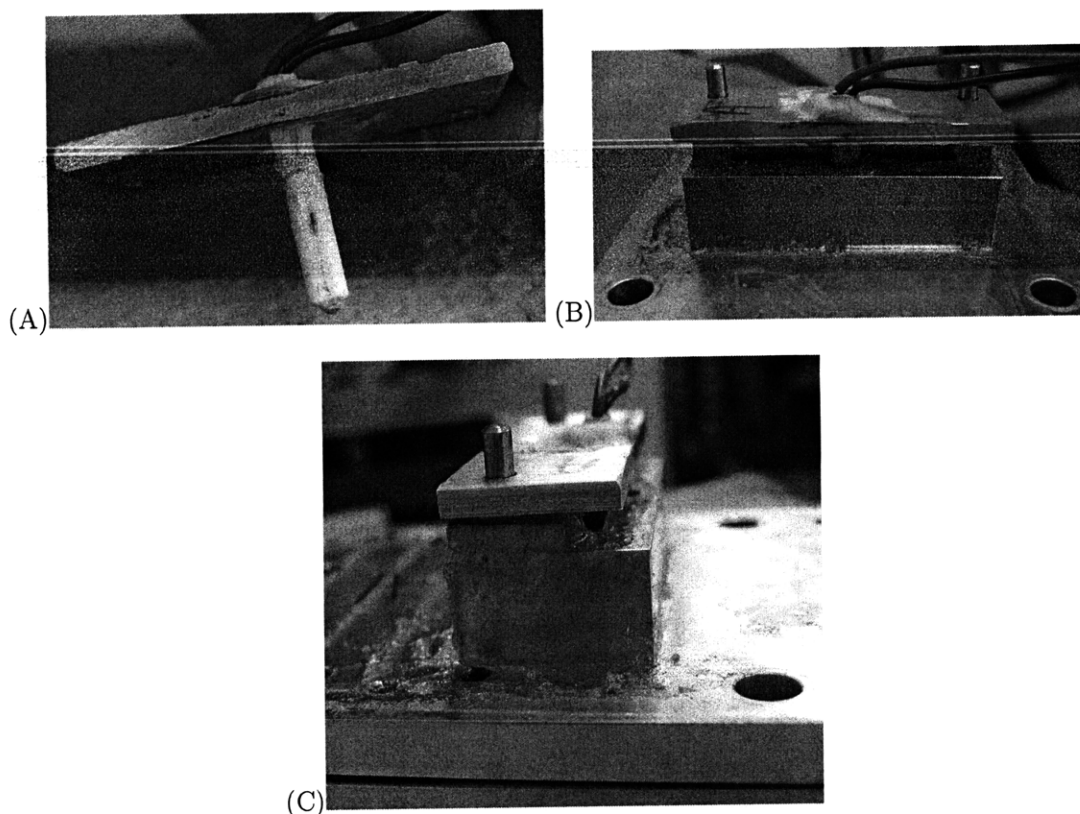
(A) Image showing the thermocouple assembly for measuring the temperature of PDMS. (B) Image showing thermocouple assembly inserted into top half of centrifugal mold assembly. (C) Side view image of thermocouple assembly inserted into top half of centrifugal mold assembly.
